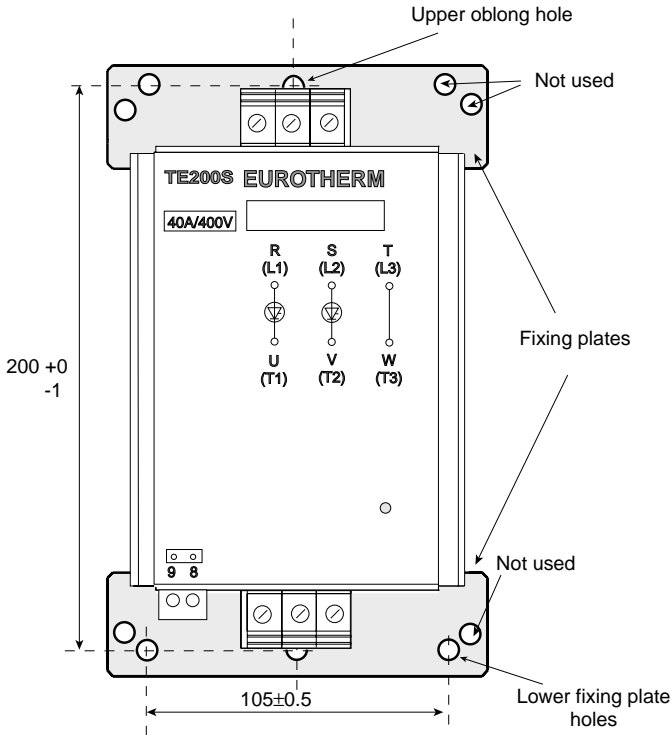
Bulkhead drilling and mounting dimensions (in mm) for the TE200S unit
